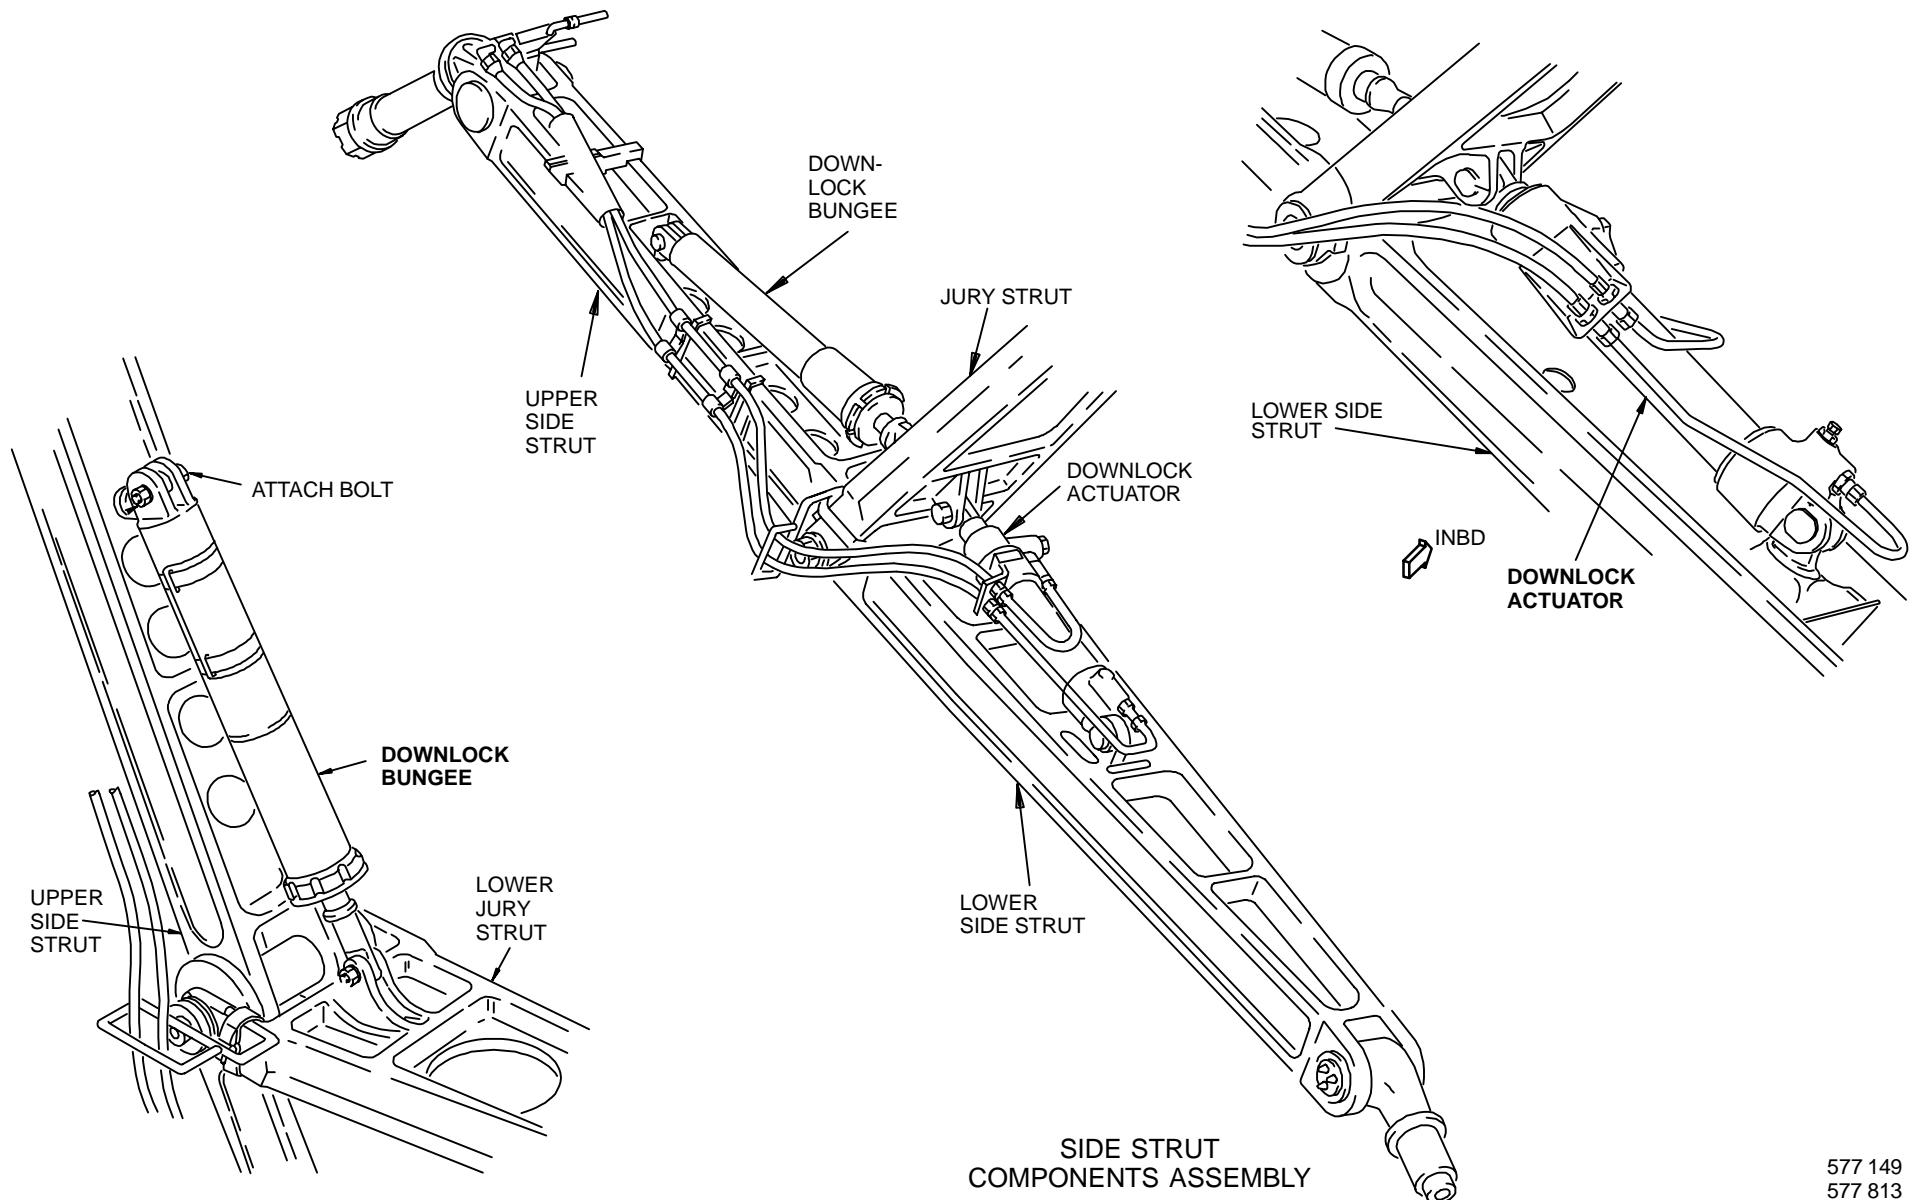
WING GEAR DOWNLOCK COMPONENTS
